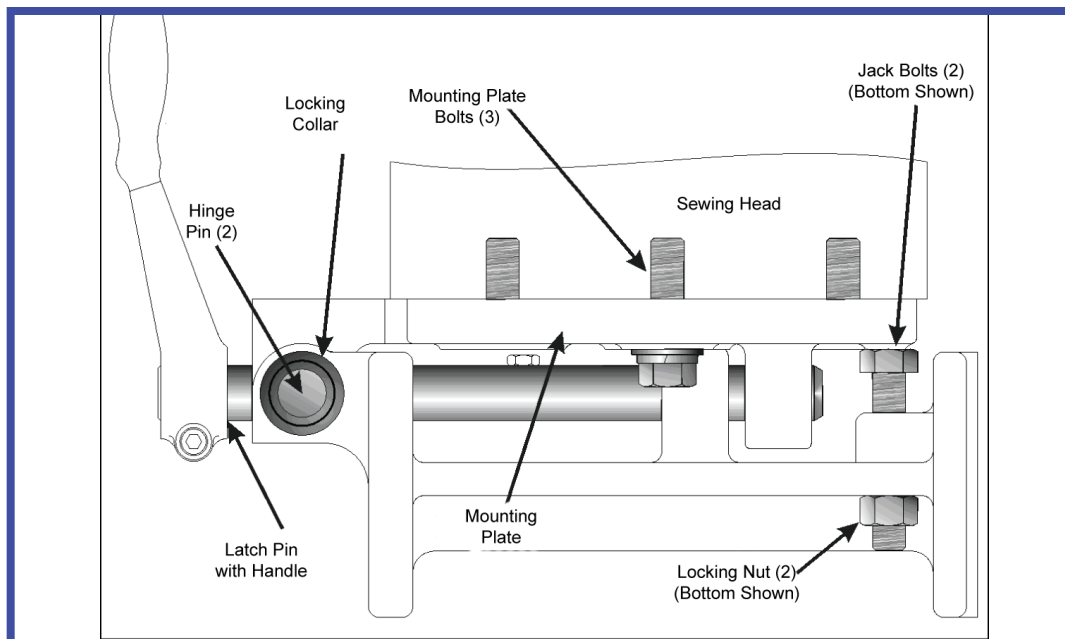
Sewing Head Mounting Plate & Jack Bolts
